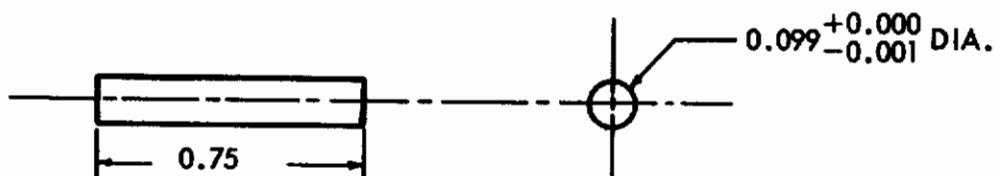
DOUBLE SHEAR SPECIMEN
